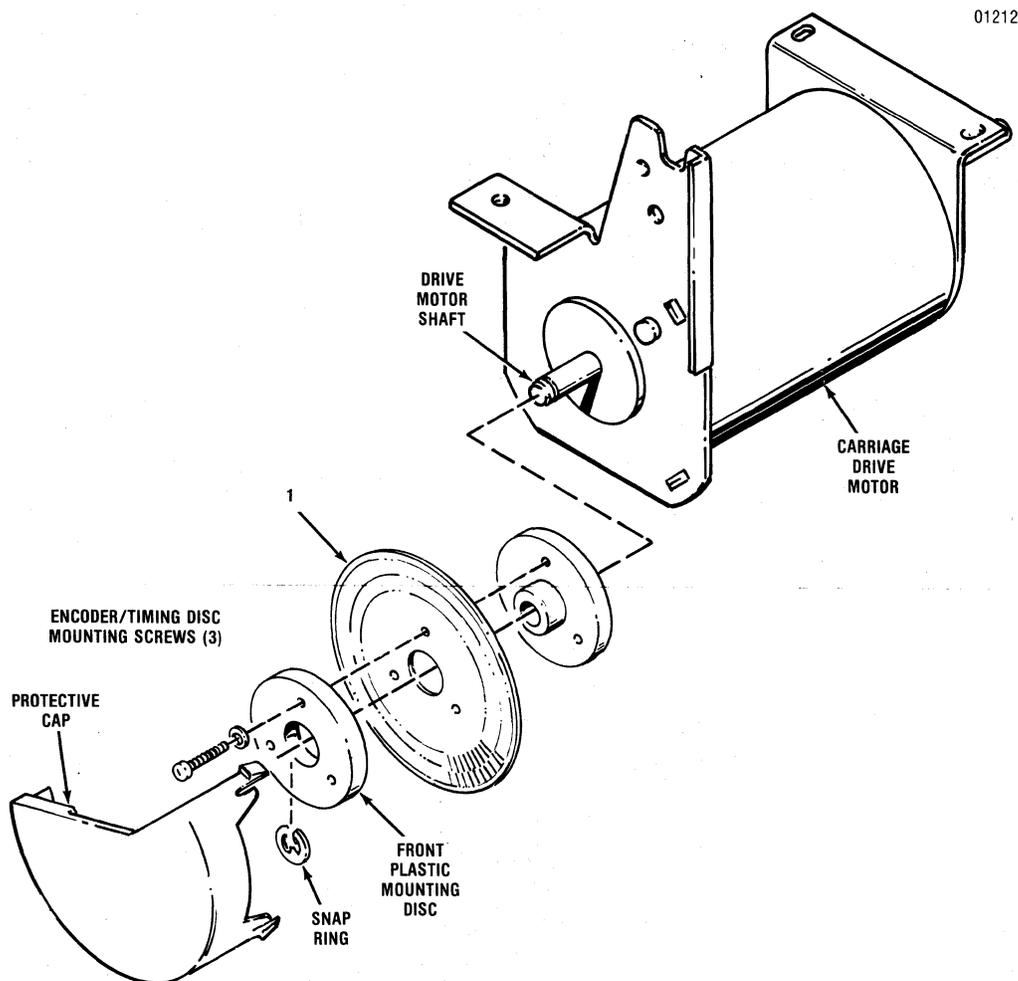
REMOVAL/REPLACEMENT, ENCODER/TIMING DISC
